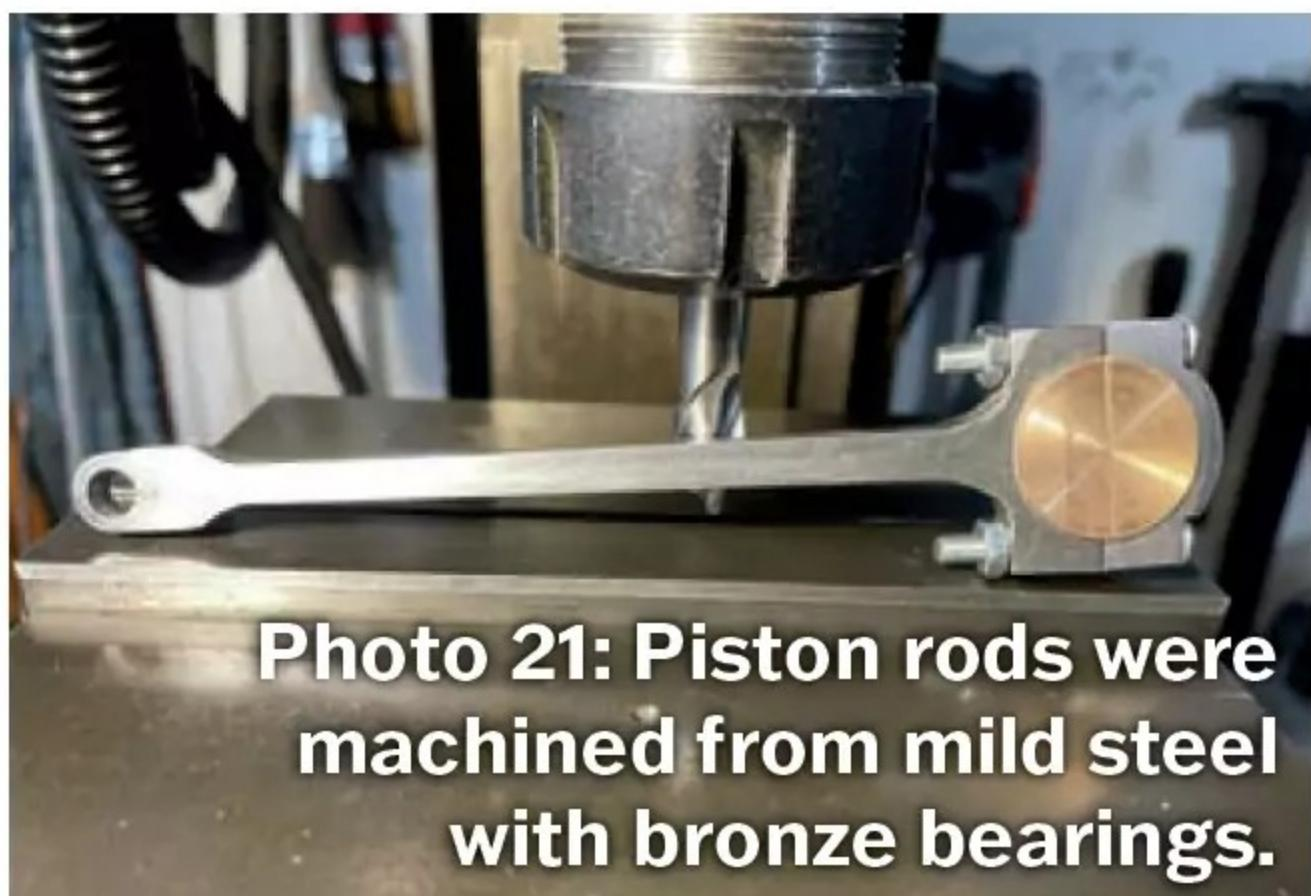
Piston rods were machined from mild steel with bronze bearings.
